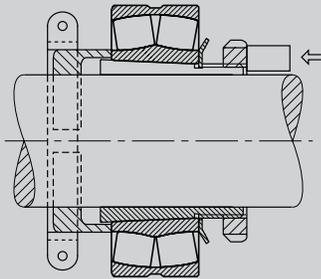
Dismounting of Adapter Sleeve by using Stop Nuts
